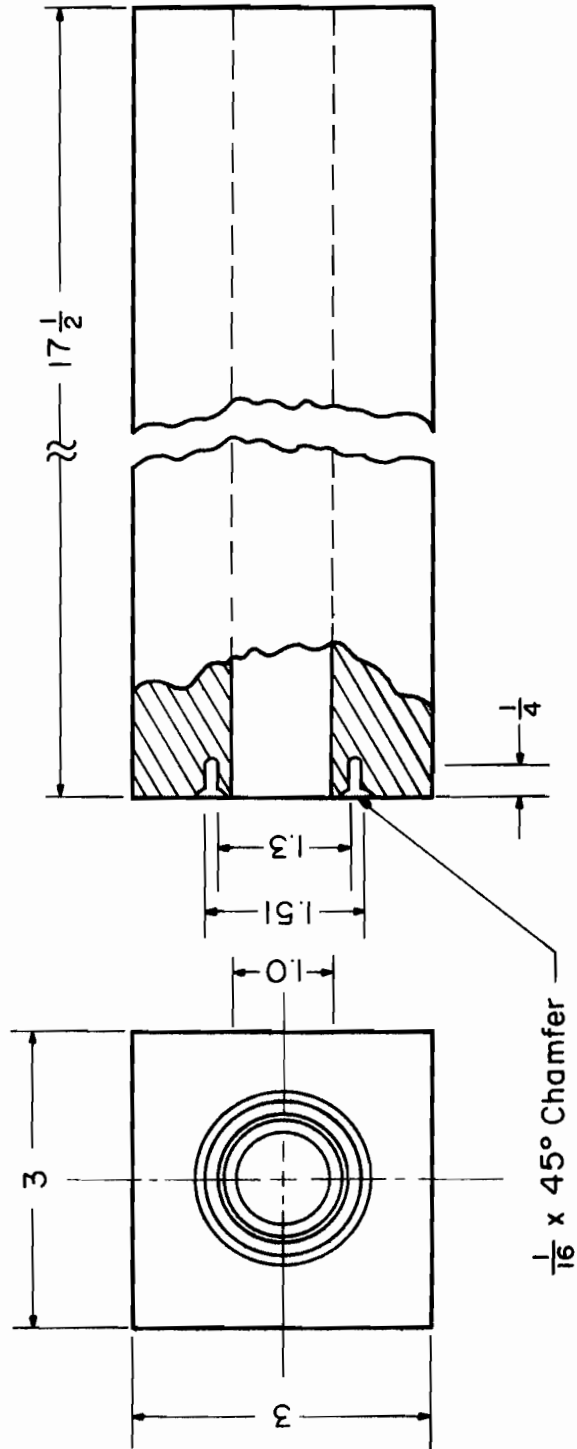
Detail drawing of transparent barrel. Note: All dimensions are in inches.
